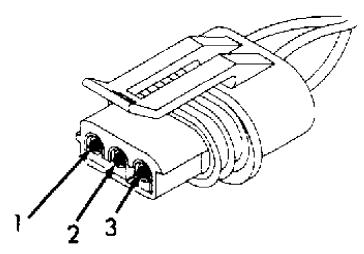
Identifying ABS Pump/Motor Relay Connector Terminals Courtesy of Chrysler Corp.
